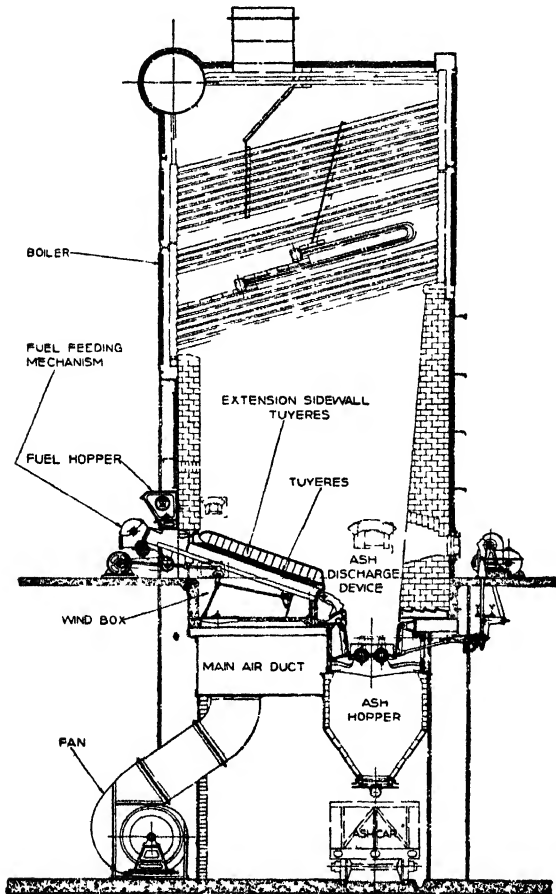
Installation of Westinghouse underfeed stoker. (*Westinghouse Electric & Manufacturing Co.*)
